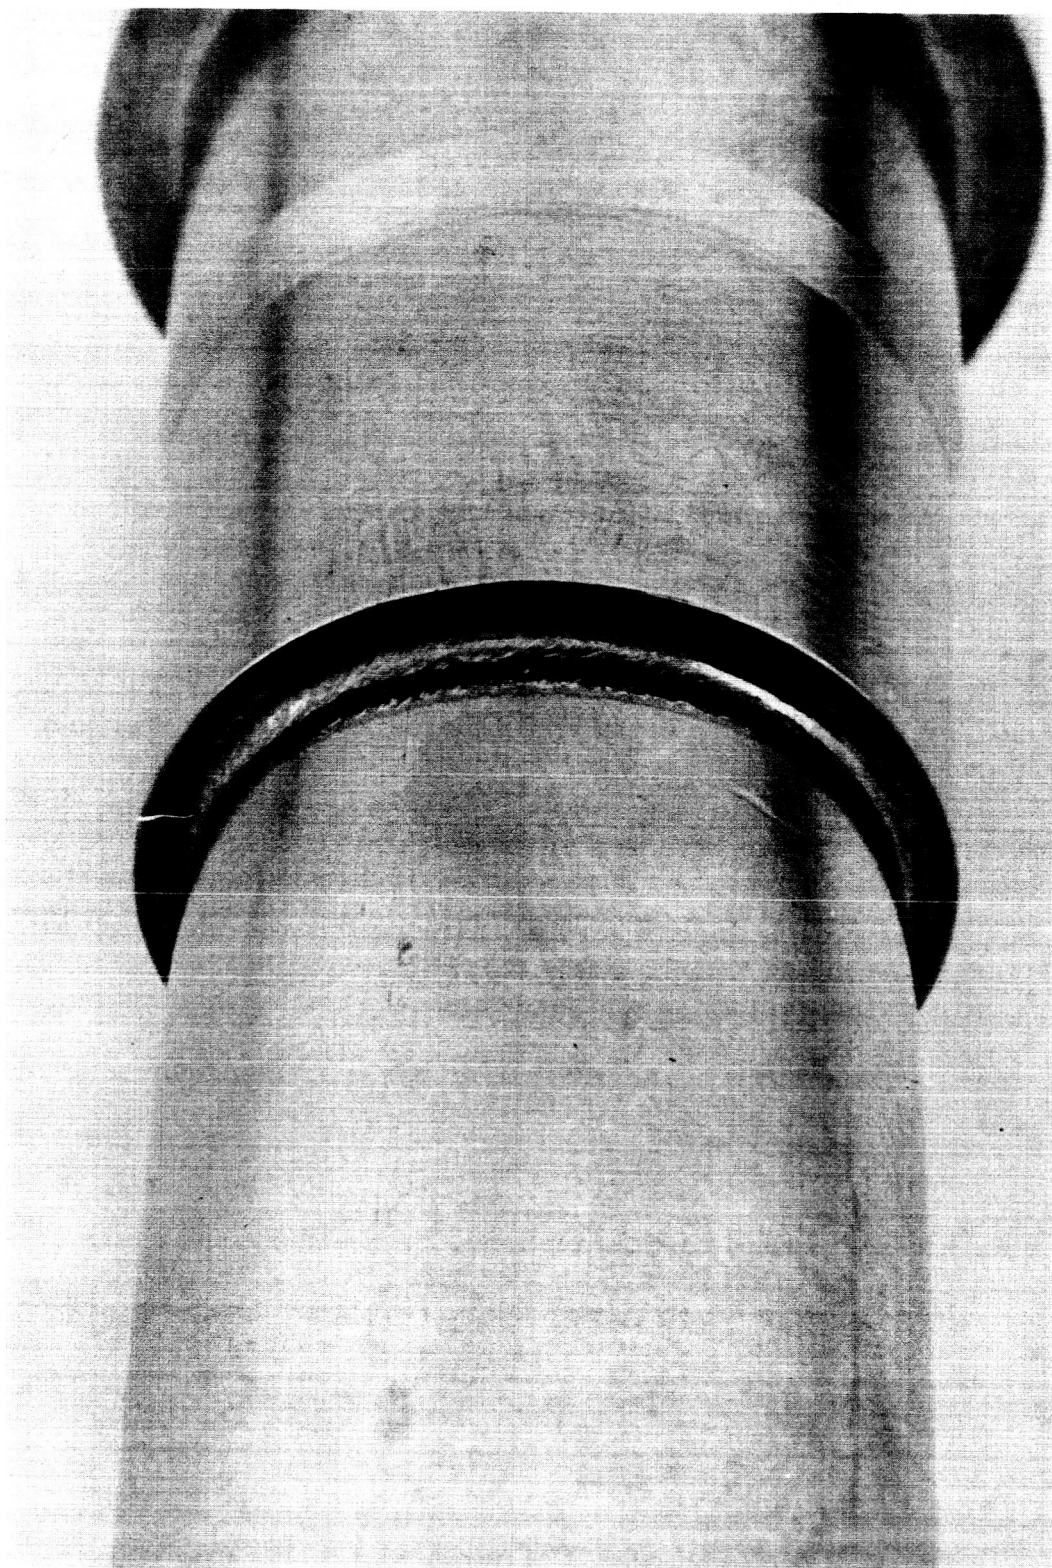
Electron Beam Weld after 15,000 psi pressure test.
